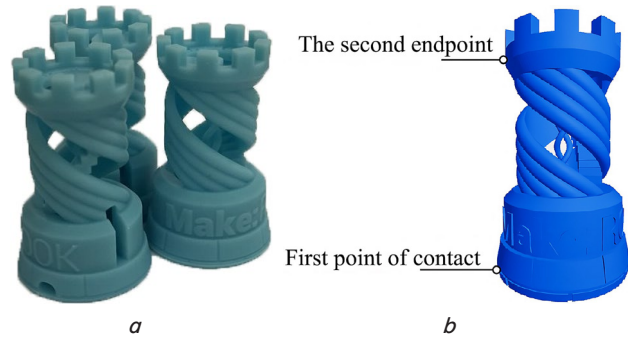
Test samples: *a* – manufactured samples; *b* – sample control points
